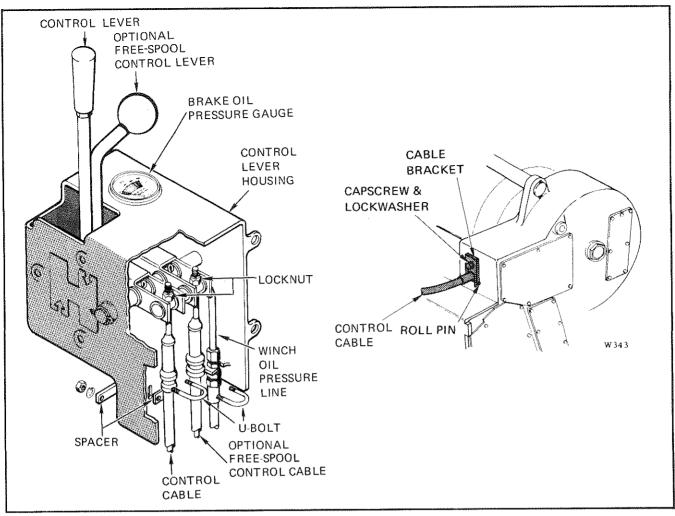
CONTROL CABLE ADJUSTMENT
